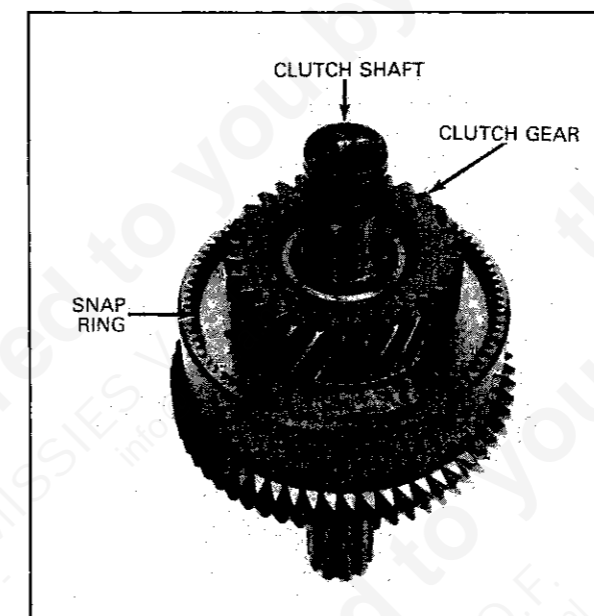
PRESSURE PLATE SNAP RING REMOVAL
